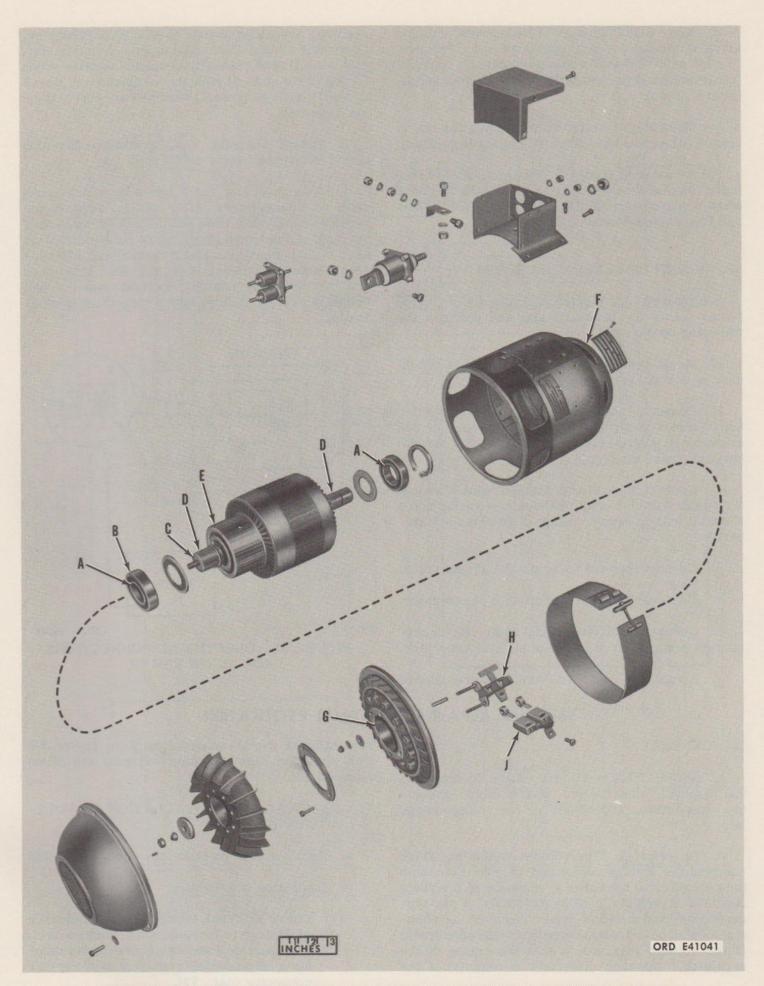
GENERATOR INSPECTION POINTS, AND REPAIR STANDARD POINTS.
